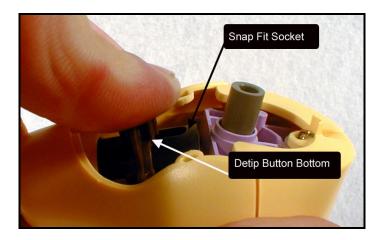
Engage Snap Fit Socket with Detip Button Bottom
